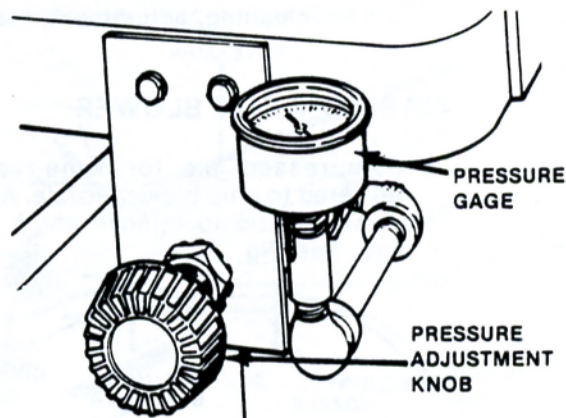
FEED FORCE ADJUSTMENT KNOB & GAGE.
